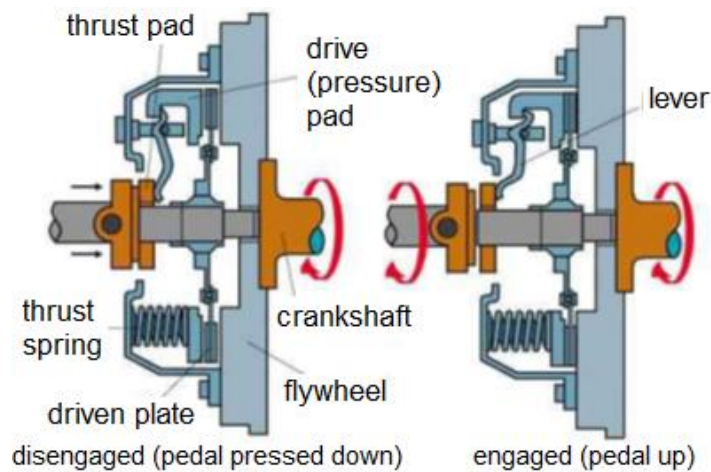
Illustration of disengaged & engaged clutch (Yao, 2008)
